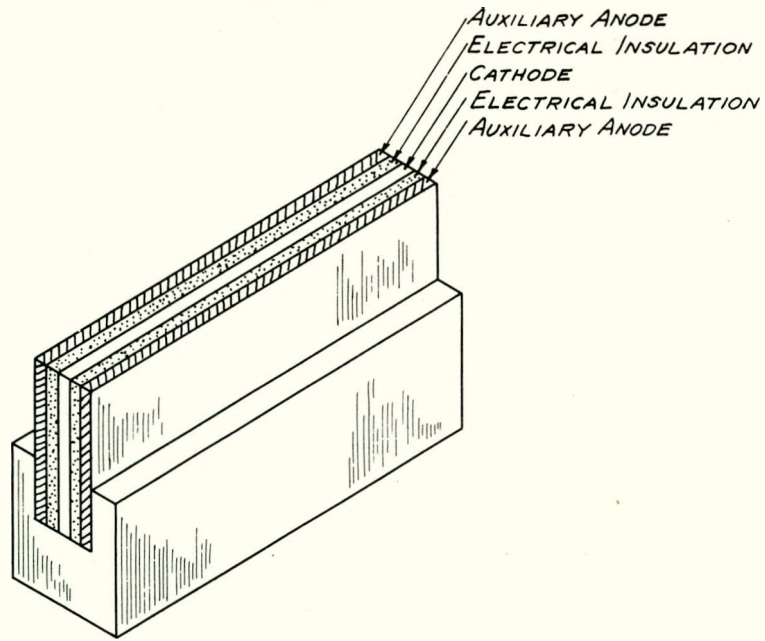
Line-Type Cathode-Auxiliary Anode Assembly.
